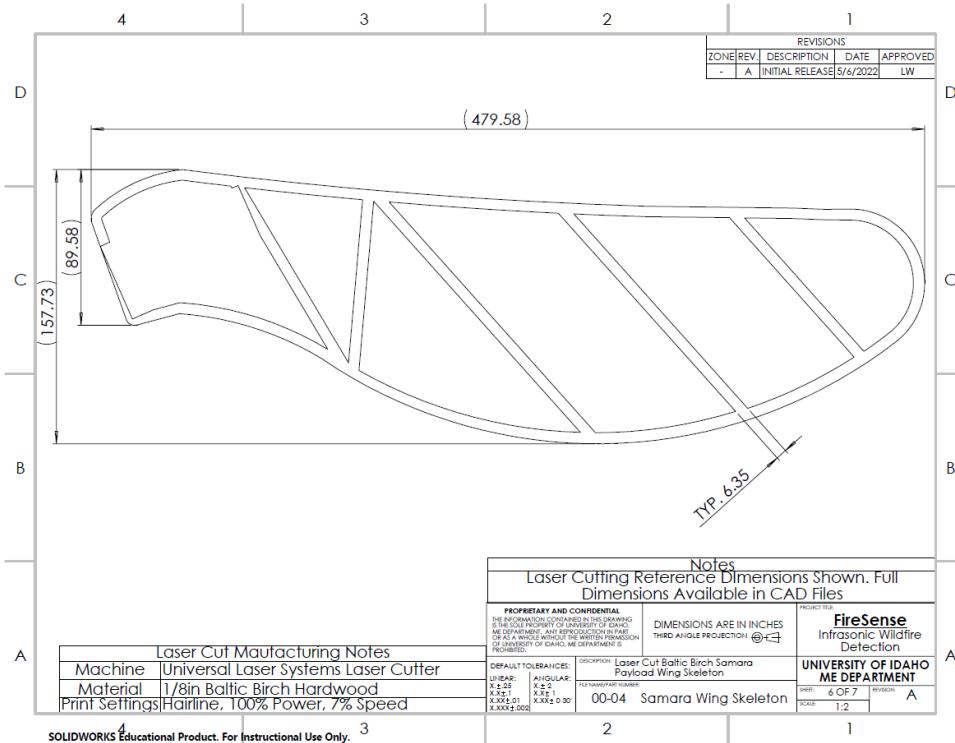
Technical Drawing Package Sheet 6, Samara Wing Skeleton
